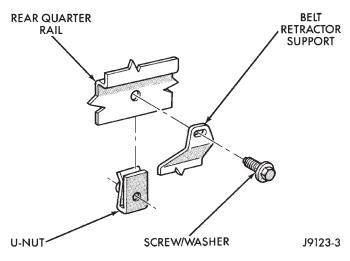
Shoulder Belt Retractor Support Removal/ Installation
